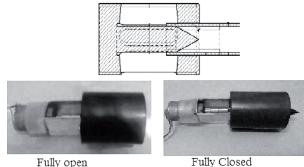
Blockage Cone – Computer Aided Drawing and Operation
